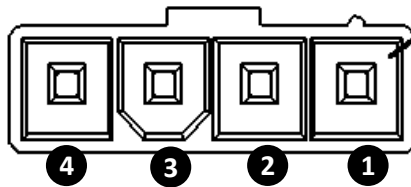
Molex 39-01-4041 Unit Connector, Face View
